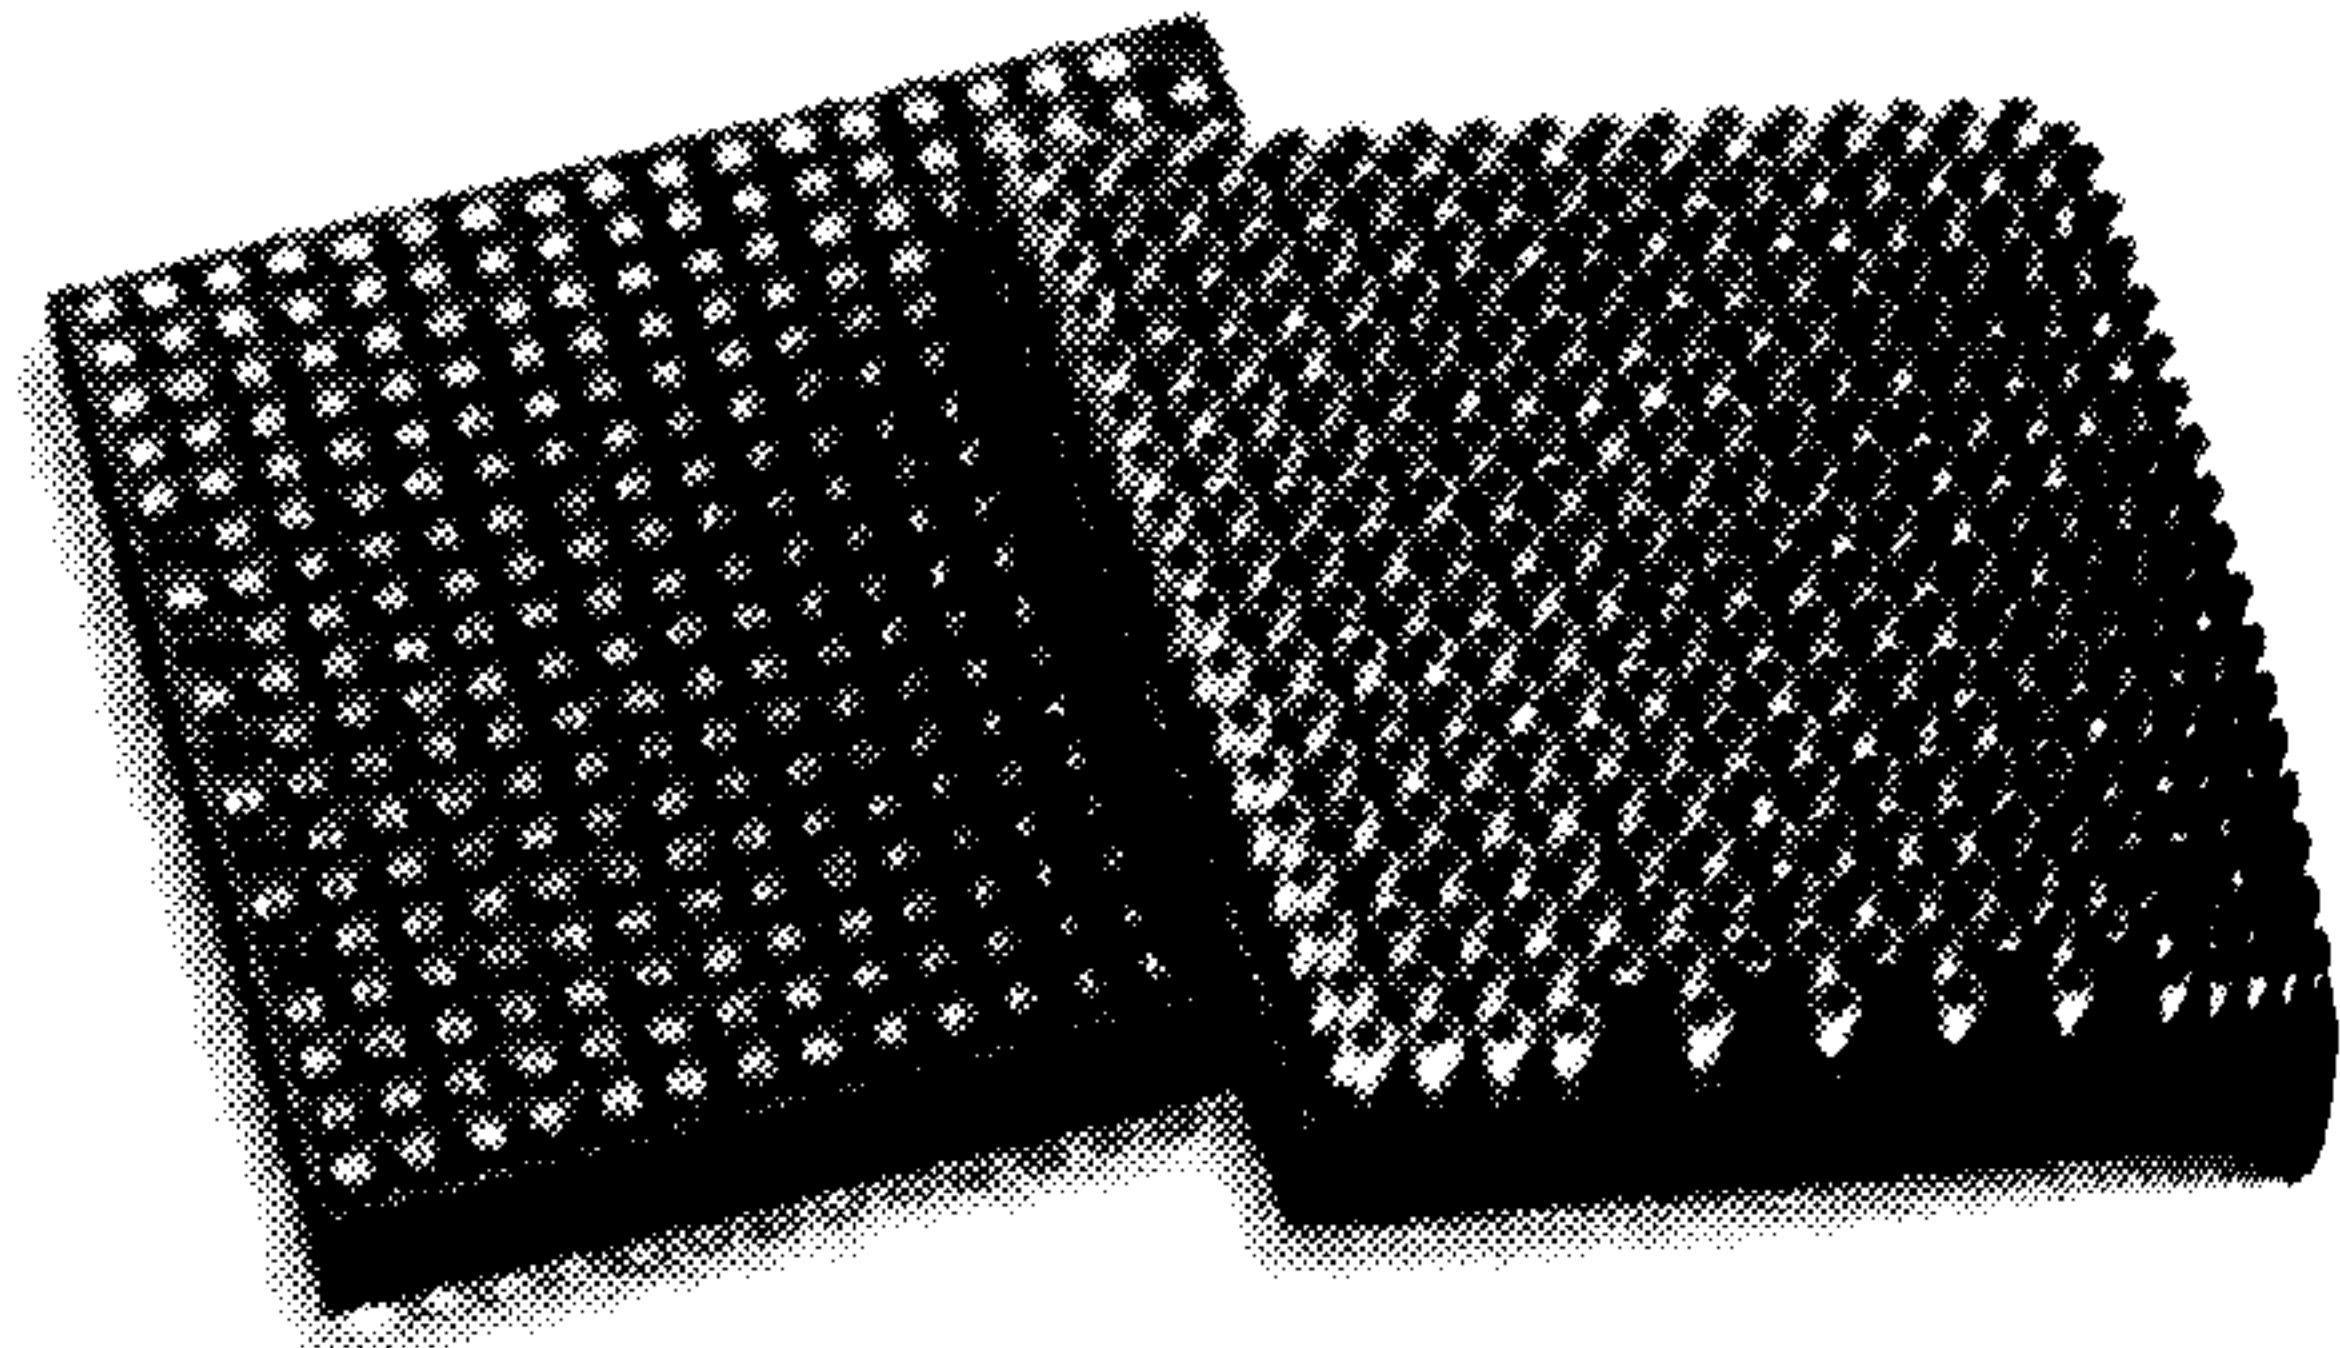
Top and bottom views of a socket to accommodate pin-grid-arrays on a circuit board with only surface mounted components.
